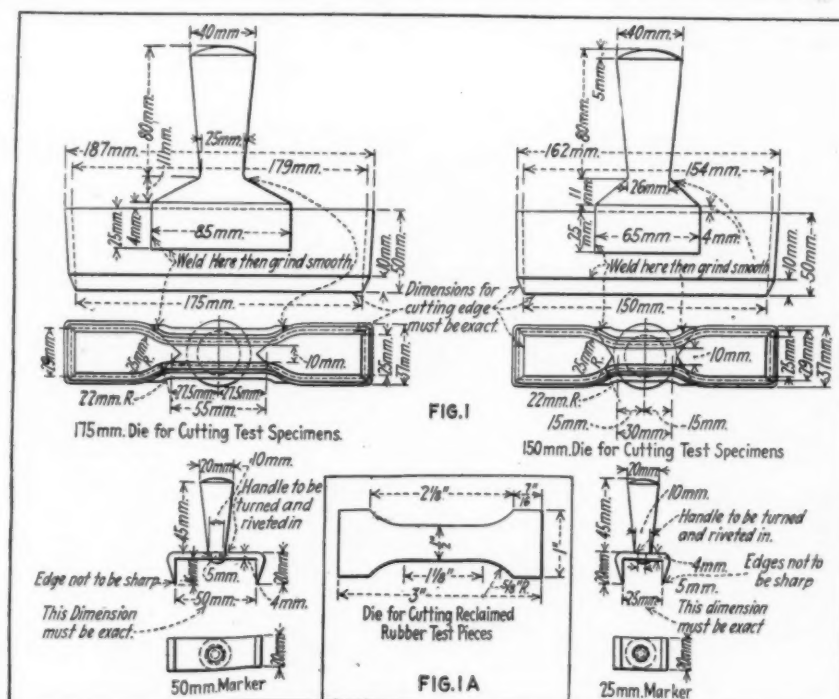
STANDARD DIES FOR CUTTING AND GAGING TEST PIECES. FIG. 1-A. STANDARD DIE FOR CUTTING SAMPLES OF VULCANIZED RECLAIMED RUBBER.
